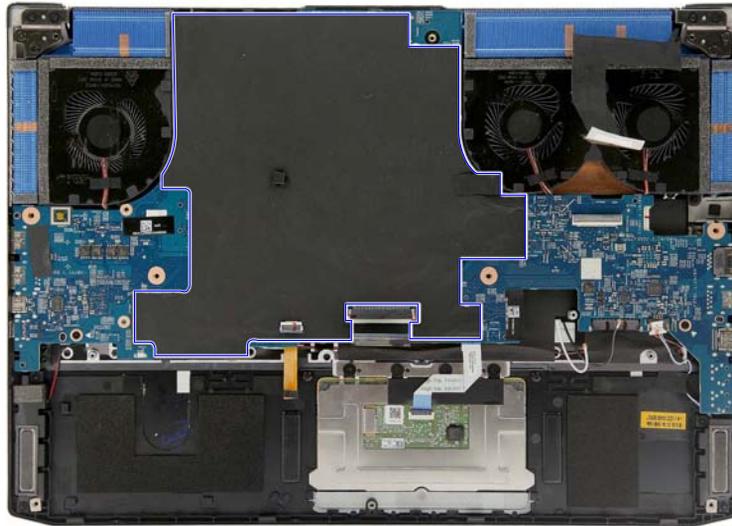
Mainboard Connector - Touchpad Cable
